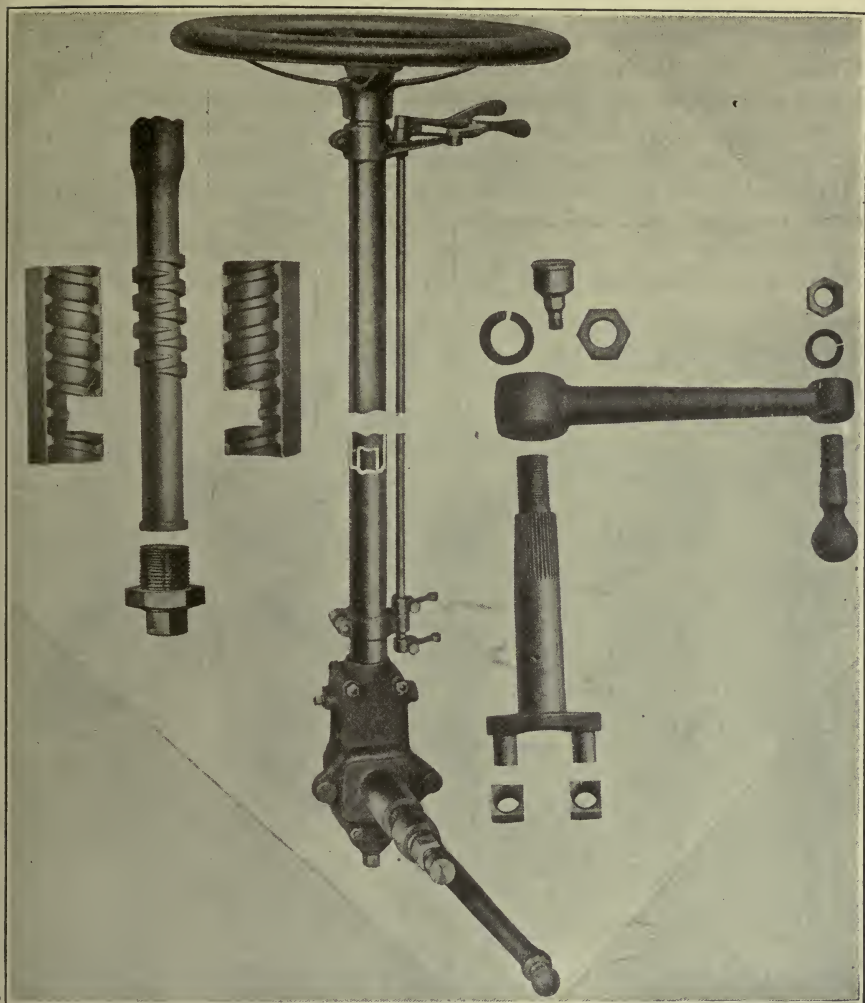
Lavine Screw and Nut Gear, Details and Assembly.
